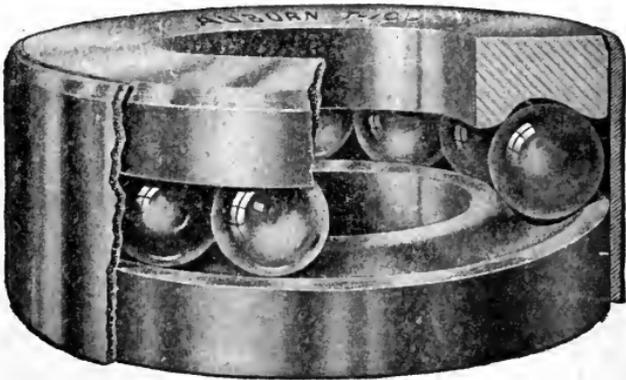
Auburn Self-Contained Ball Thrust Bearing
